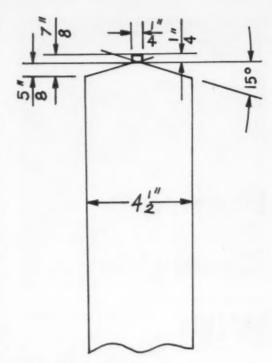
Detail of doublebevel on 41/2 in. plate. Note 1/4 in. square bar welded to plate edge to form J-groove.
